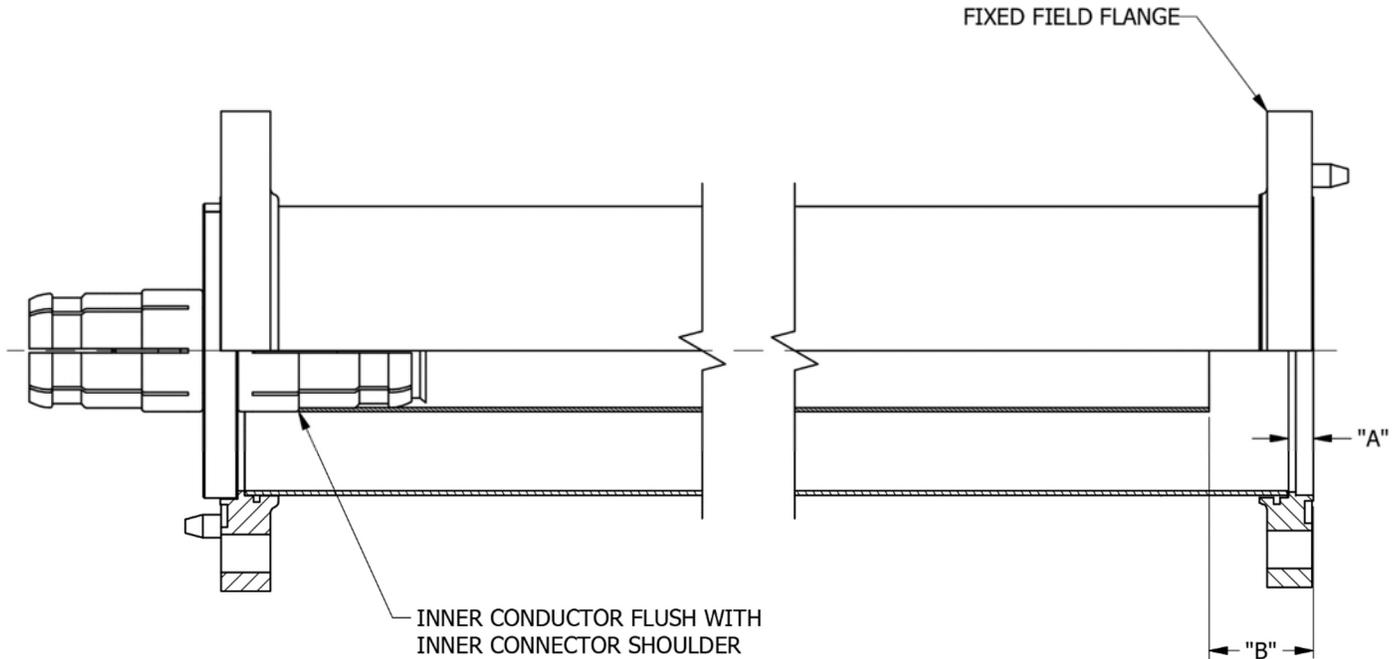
Outer and Inner Conductor Cut Back Dimensions for Fixed Field Flanges and Field Cut Kits. See Table 1 for additional information.
